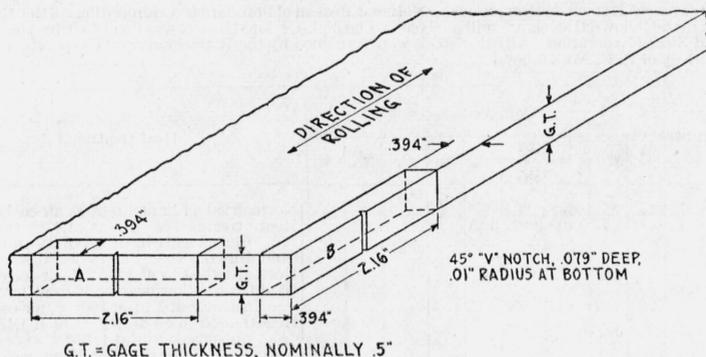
Location of Charpy impact specimens in wrought aluminum alloy plate.
